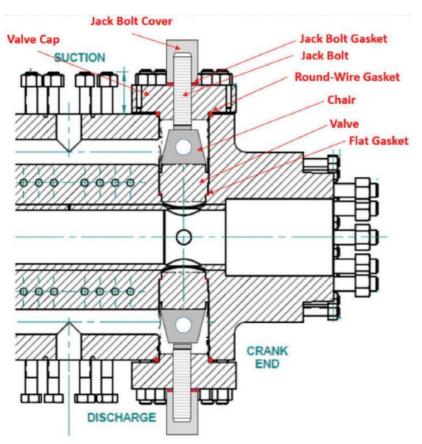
Cross section of the valve and cap assembly on the original cylinders. The valve cap bolting provided the force needed to crush a round-wire steel gasket between the cap and the outer edge of the valve pocket bore in the cylinder to accomplish primary gas sealing between the cap and the cylinder. The jack bolt was intended to provide the force necessary to crush the flat steel gasket under the valve at the valve pocket seating ledge. Both the valve cap bolting and the jack bolt had to provide the necessary preload to crush the metal gaskets for sealing; in addition, the valve cap bolting had to resist the hydrostatic pressure load on the underside of the valve cap.
